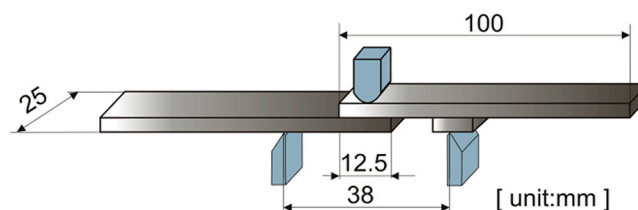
Schematic drawing of flexural test of a welded specimen.
